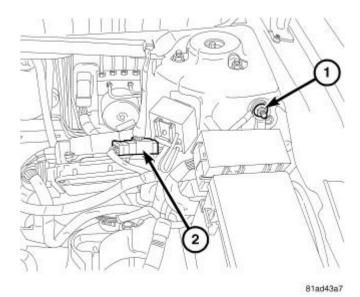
BATTERY CABLE Courtesy of CHRYSLER LLC
